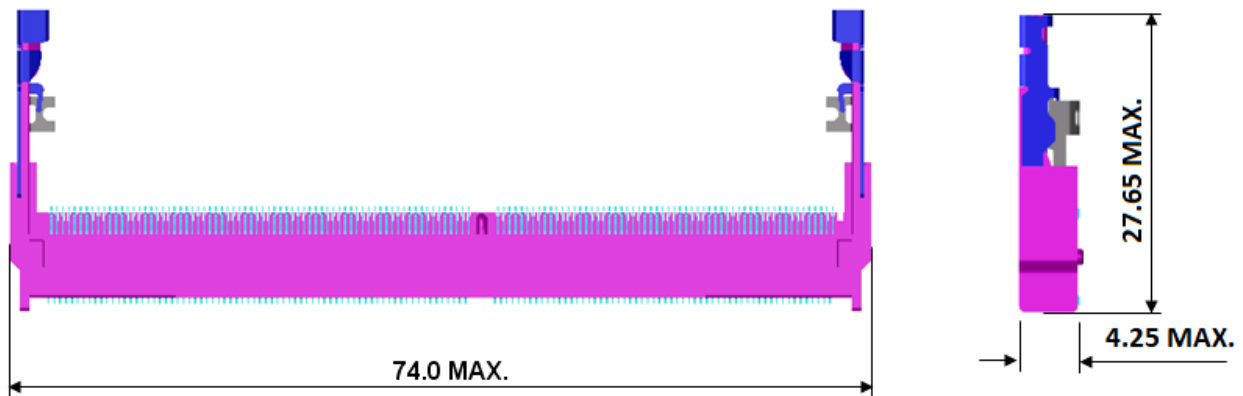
SODIMM DDR5 Surface Mount (SMT) Connector Socket Outline 4.0 mm height
